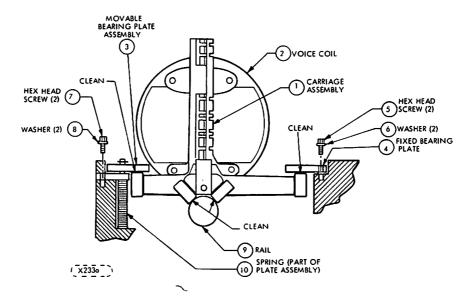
CARRIAGE RAILS AND BEARINGS
